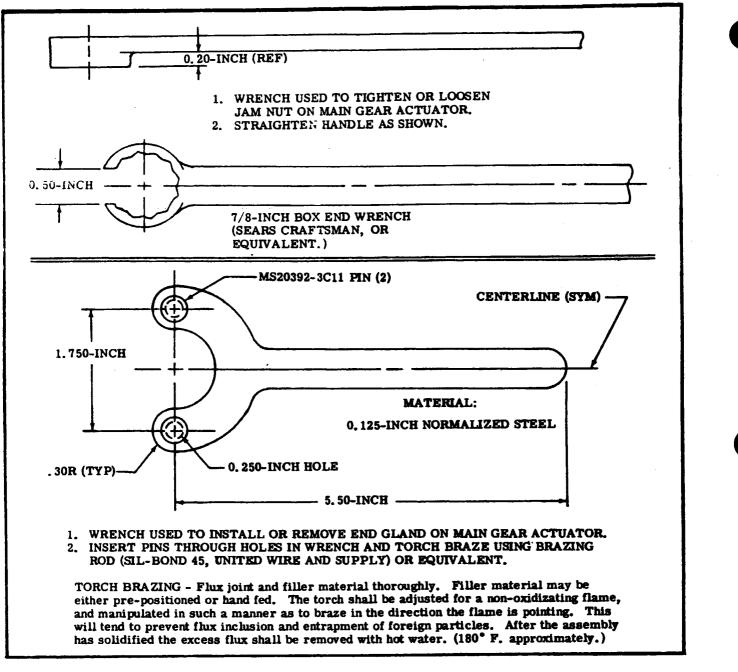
Fabrication of Main Landing Gear Actuator End Gland Removal Tool
